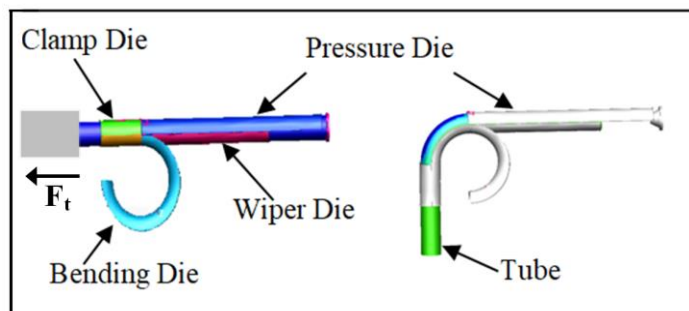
Finite element model for the rotary draw bending for tube with tension force.
